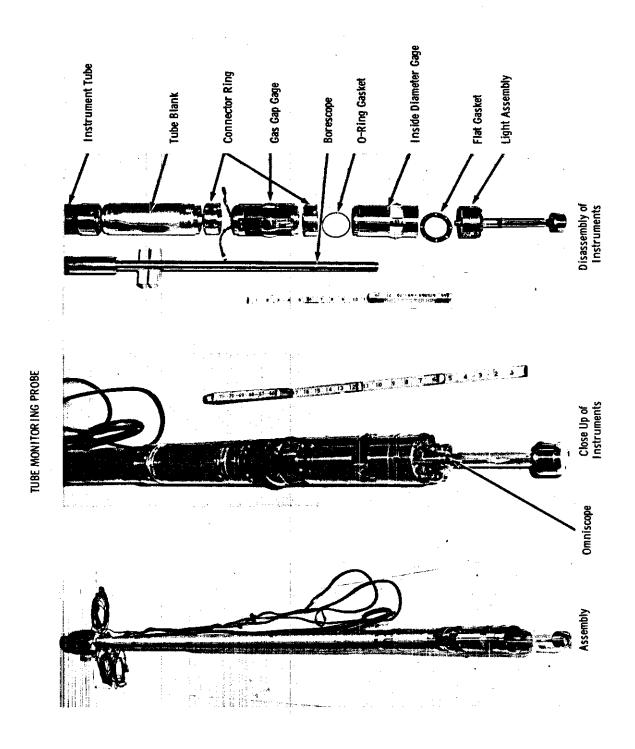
REDESIGNED TUBE MONITORING PROBE
